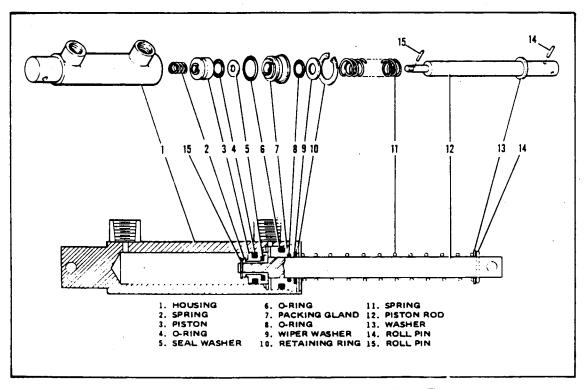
Brake Cylinder (10-27) (Toe Brake)
